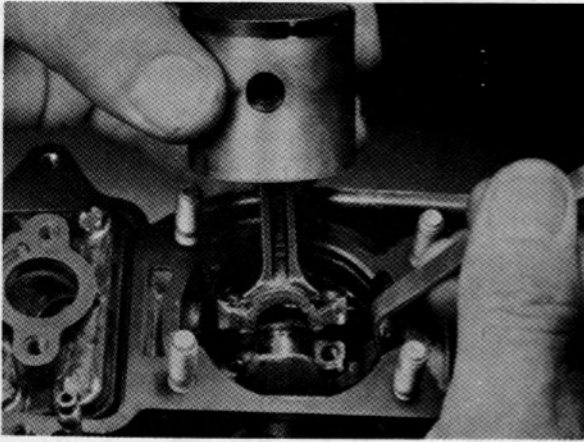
Installing piston and connecting rod assembly using locally made tool to hold rod cap in position. Tool can be made from flat strip of metal. Using grease, stick 14 rollers in cap and 14 rollers in rod; make sure that match marks on rod and cap are aligned.
